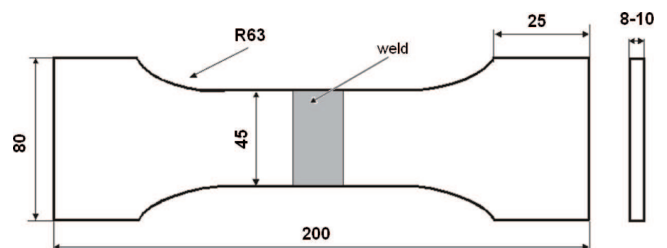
Shape and geometrical dimensions of fatigue test specimens of FSW joints
